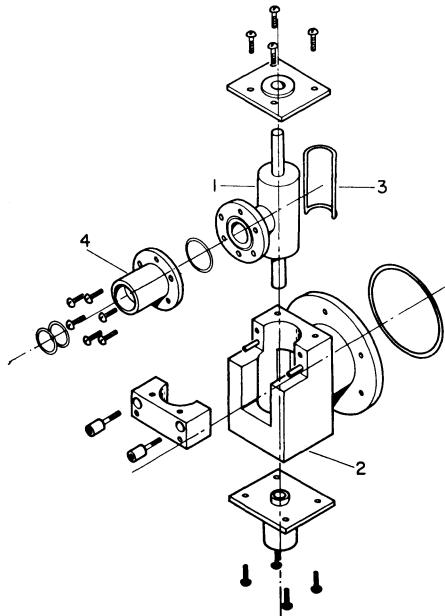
O-ring seal for axial, radial and angular displacement. After Smotrich¹¹⁵⁹ (*Courtesy of The American Institute of Physics*)
